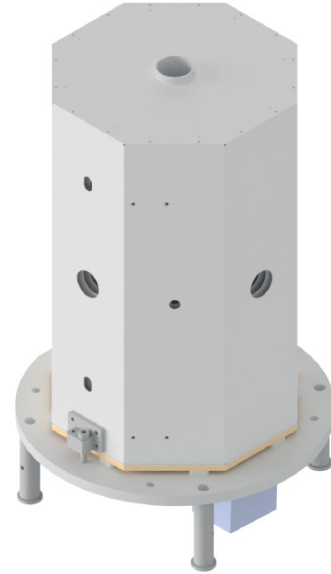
Assembly covered by 3-layer magnetic shielding.
